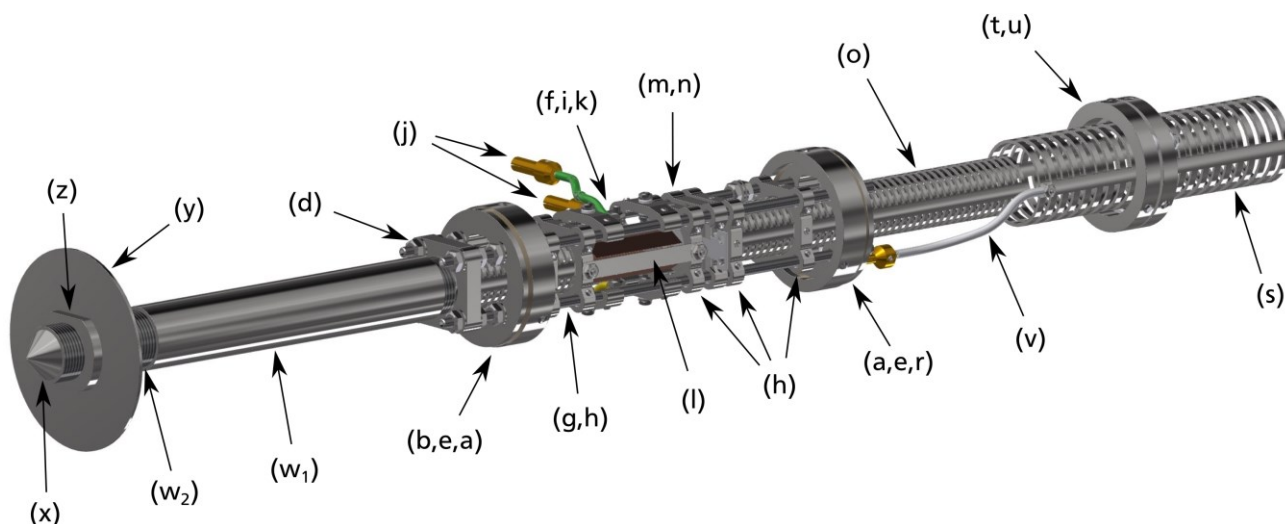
CAD Drawing of the Beam Section of the PL-BGC
